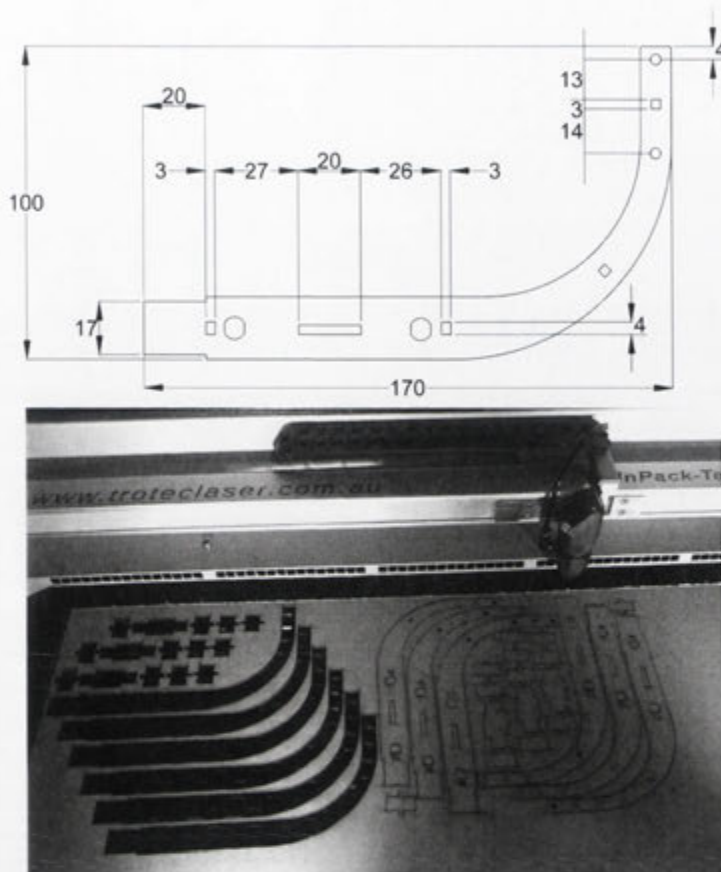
The design and laser printing of safety supports for hexacopter platform.
